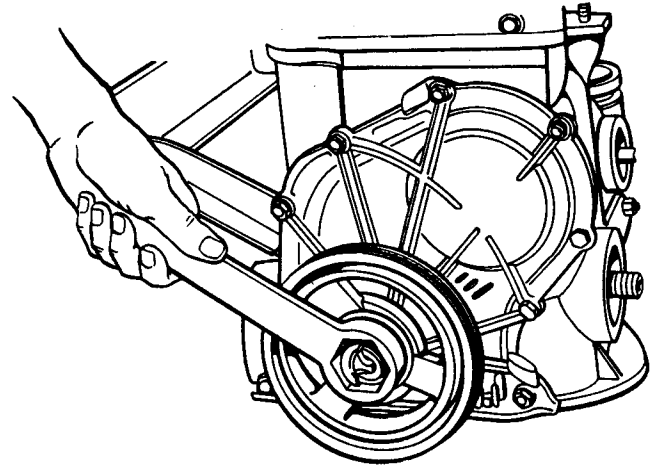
Unscrewing Crankshaft Starting Jaw with Wrench A.50121
